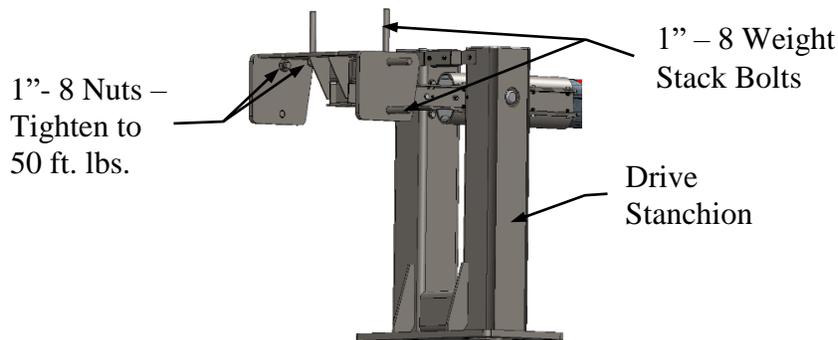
775MD Counterbalance Assembly (weights not shown for clarity)
